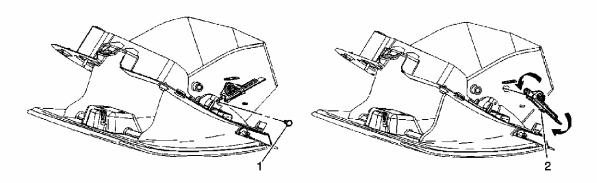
Locating Instrument Panel Compartment Door Dampener Courtesy of GENERAL MOTORS CORP.
